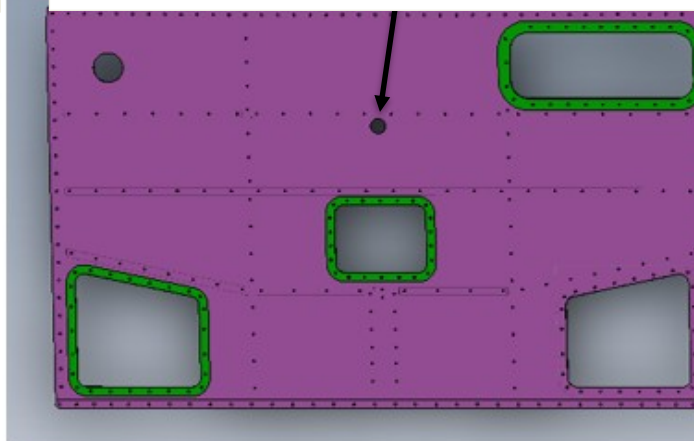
The top skin of the top box to drill the hole for the coax cable.
